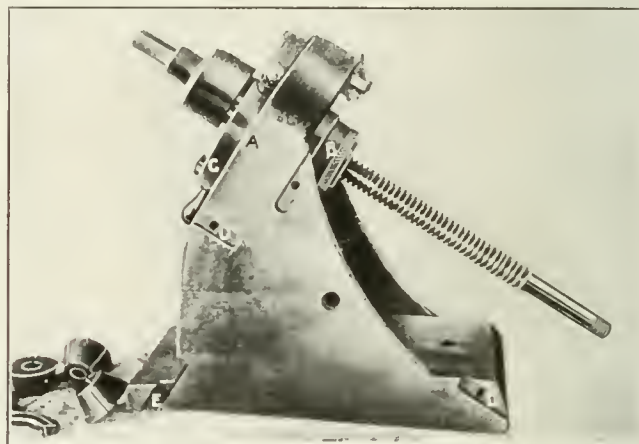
Fixture for Milling Hexagon and Square Heads on Vise Screws, etc.
